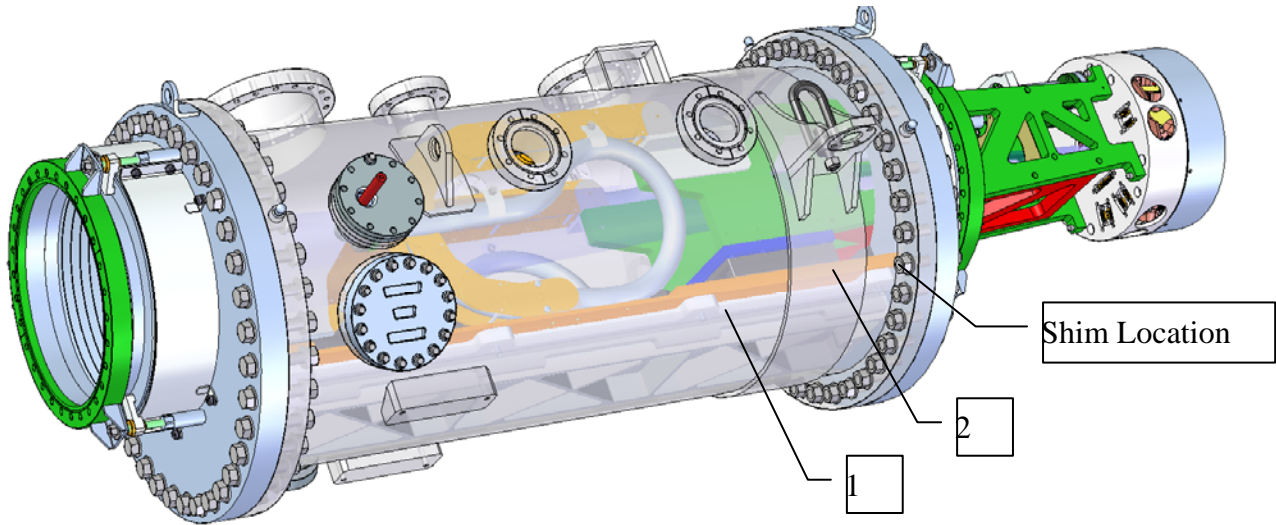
Detector Stage Chamber (Assembly SA-391-520-02) Showing Shim Location Detail
